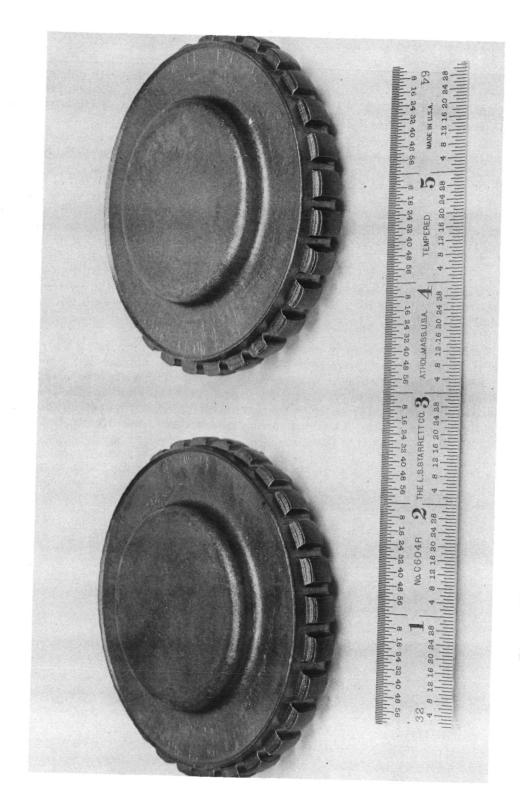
First Ausformed Gear Forgings Made on HE-55 CEFF Machine.
